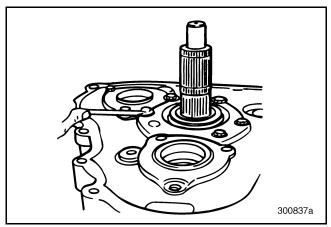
Removing Mainshaft Rear Bearing Cover Capscrews (T313L/T318L Shown)
